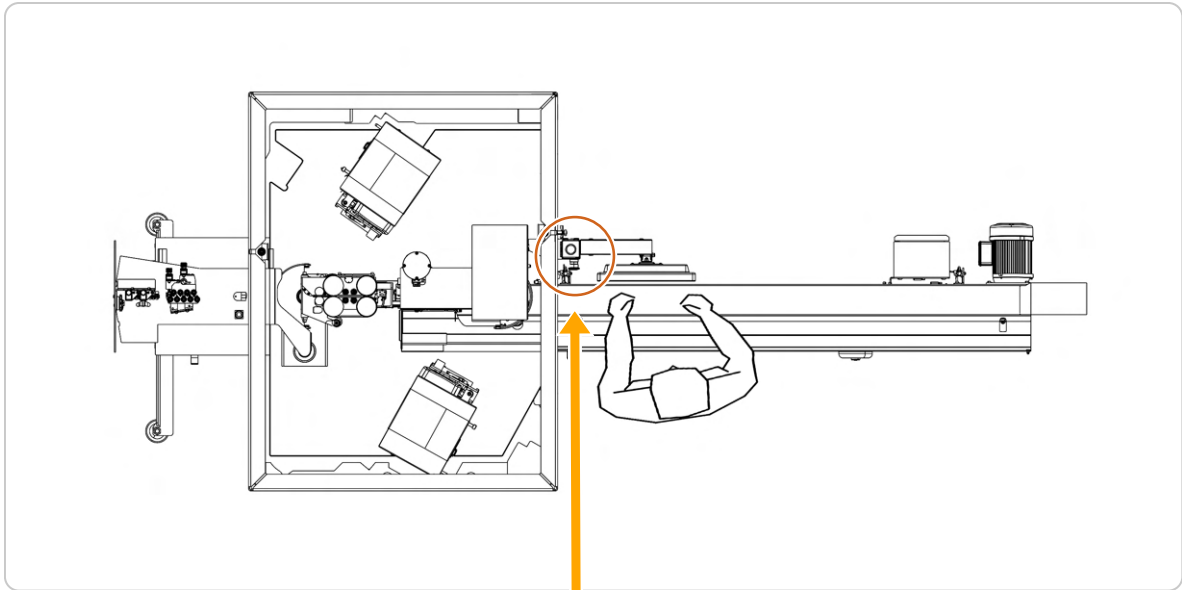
CrimpCenter 36 S - Location of the supply connections below the platform
